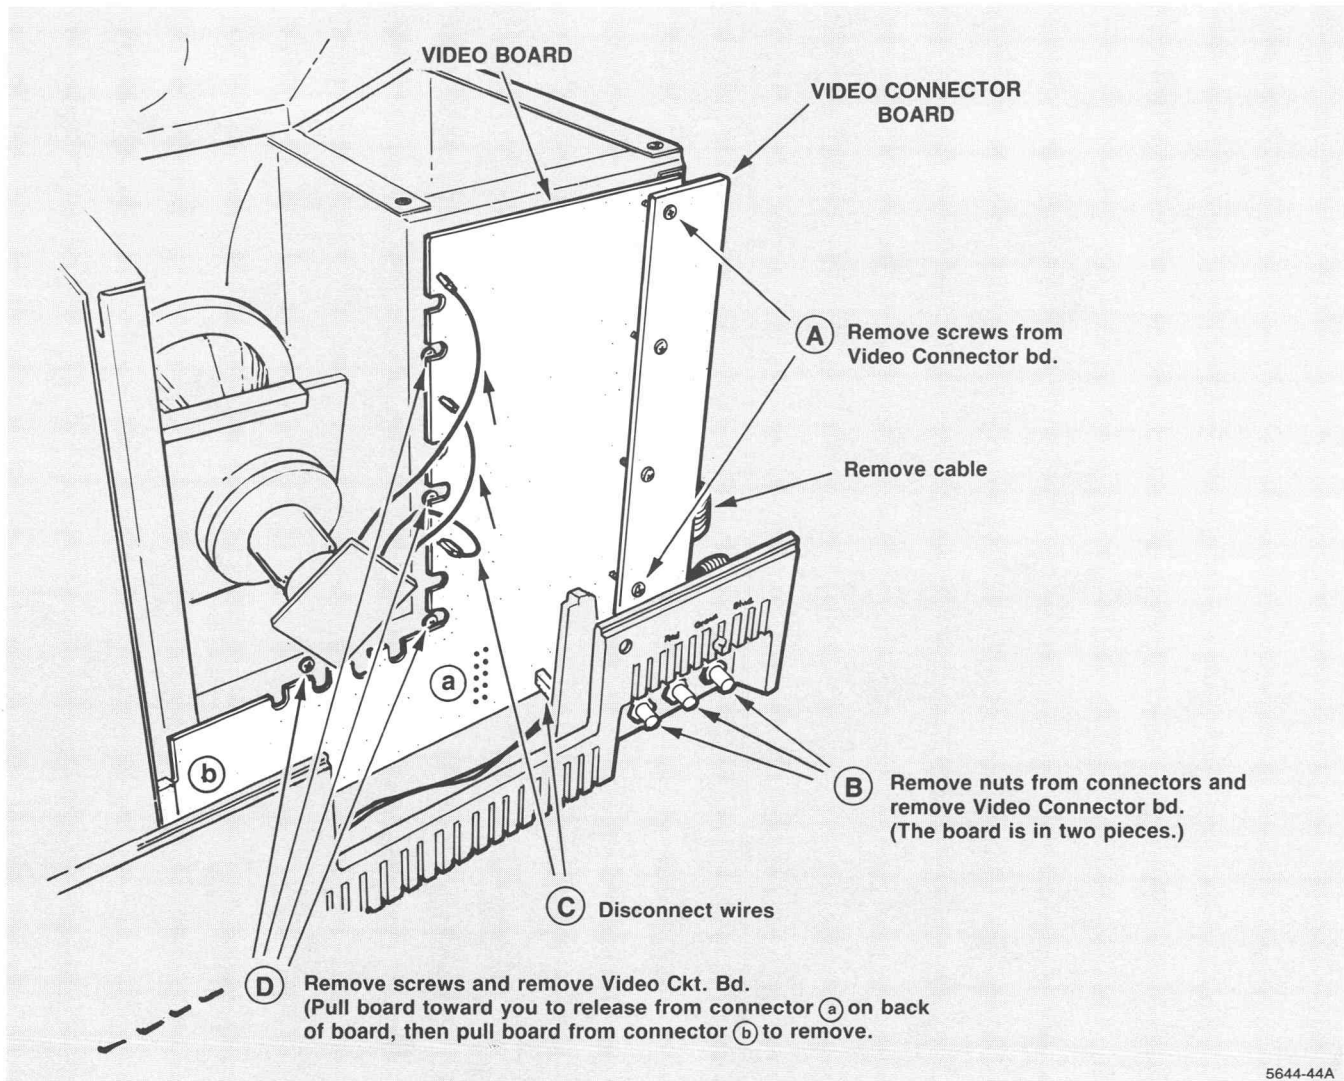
Removing the Video and Video Connector Boards (GMA302).
